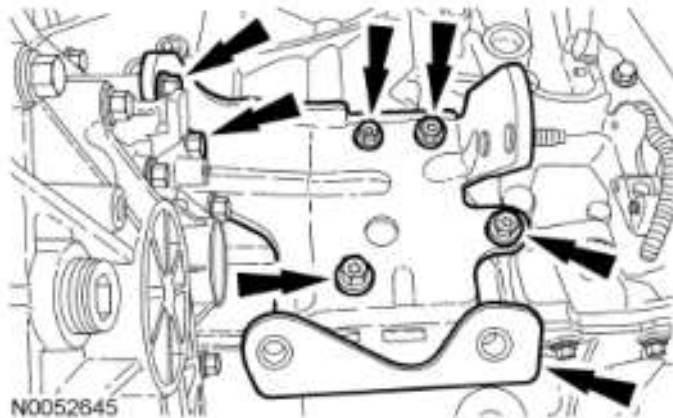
Locating Bolts And Transfer Case-To-Engine Bracket
